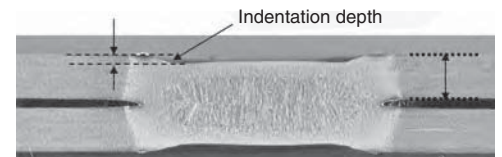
Photograph of a weld cross section showing the method of measuring electrode indentation
